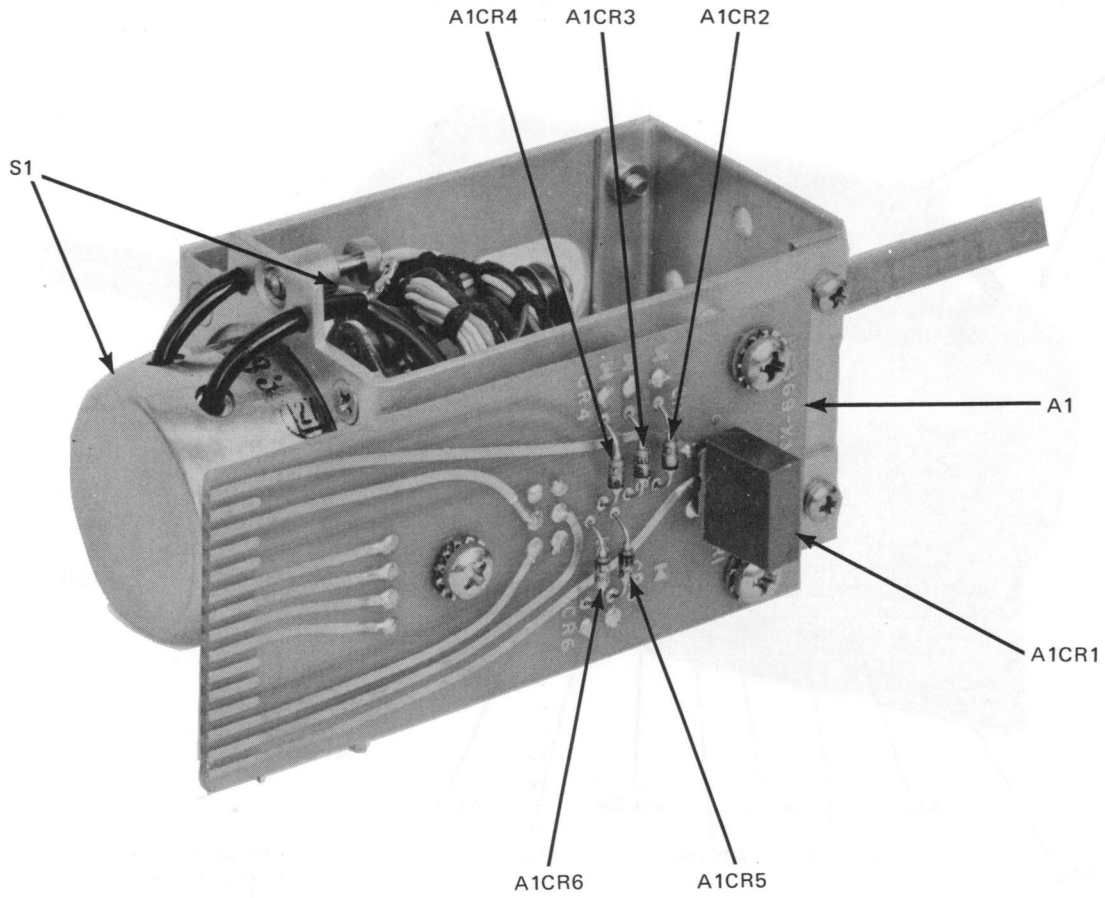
Component Locations, MODE Stepping Switch Assembly 2A14
